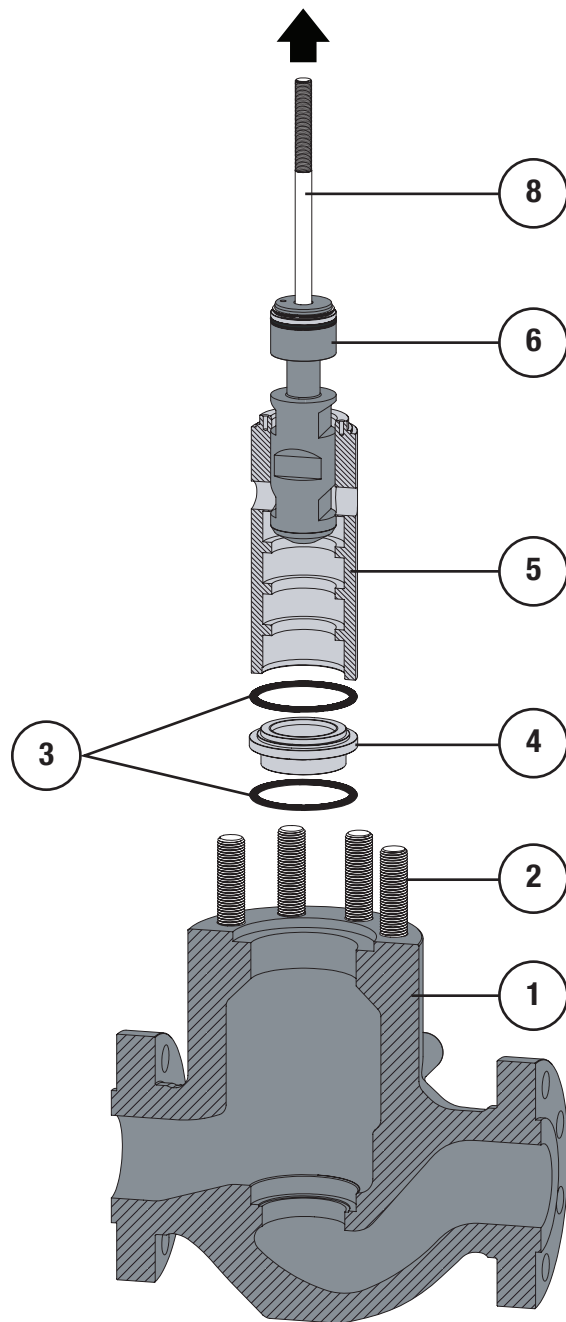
Standard Trim Parts Removal (Steps 1 - 6)
